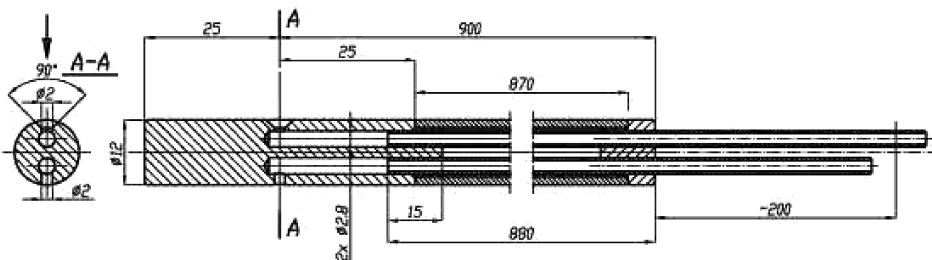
A cross-sectional view of a 2-port cylindrical probe.
